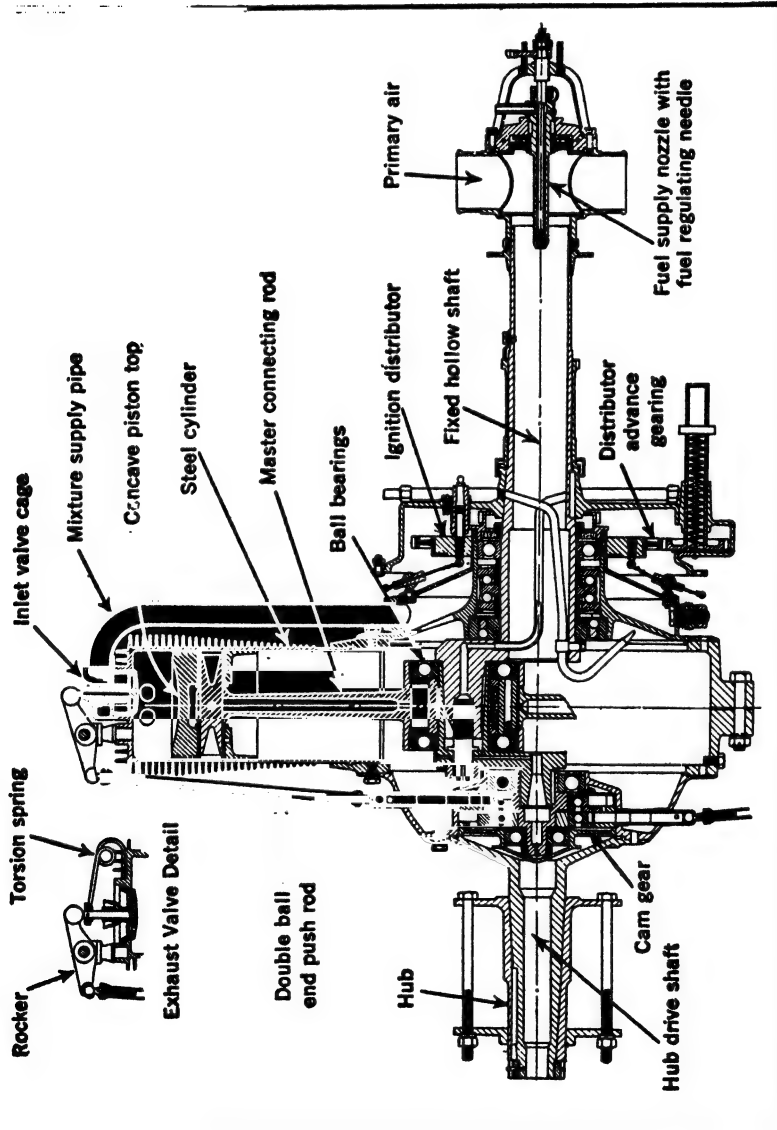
A.—Sectional View Showing Construction of Clerget 150 Horsepower Revolving Crankcase Motor.
